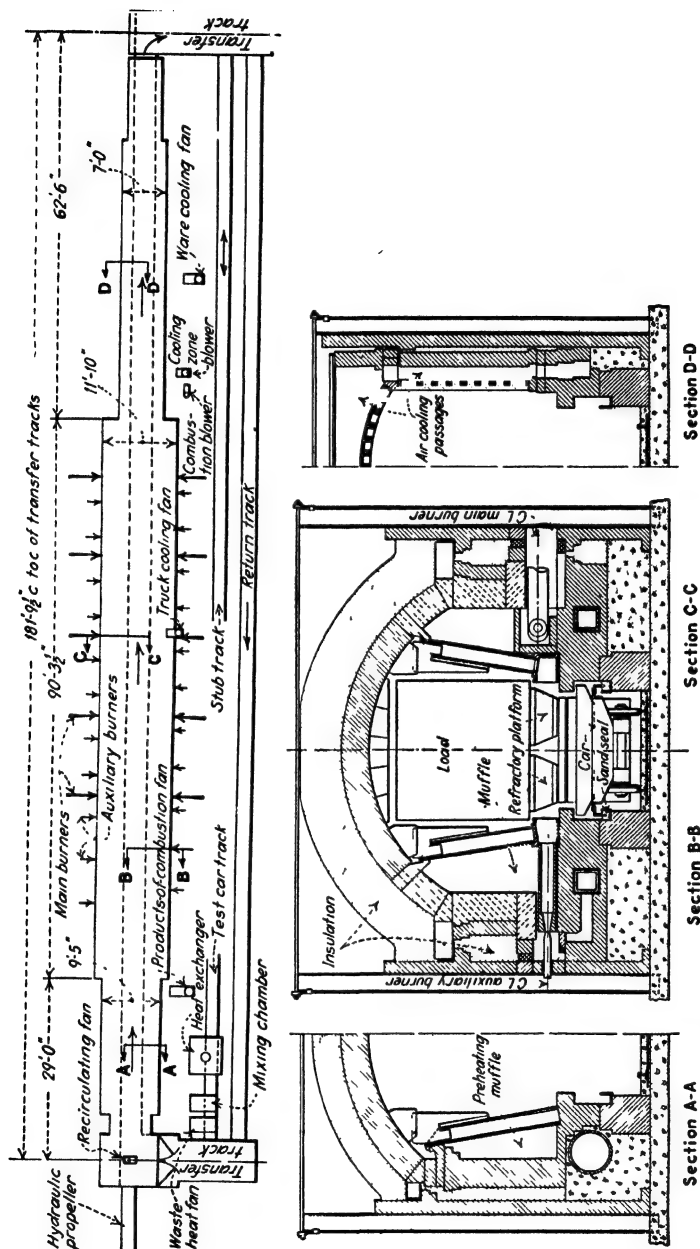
Above, plan of bisque kiln. Below, typical kiln sections: preheating section (A-A); firing section through auxiliary burner (B-B); firing section through main burner (C-C); cooling section (D-D). (Courtesy of Chemical & Metallurgical Engineering.)
